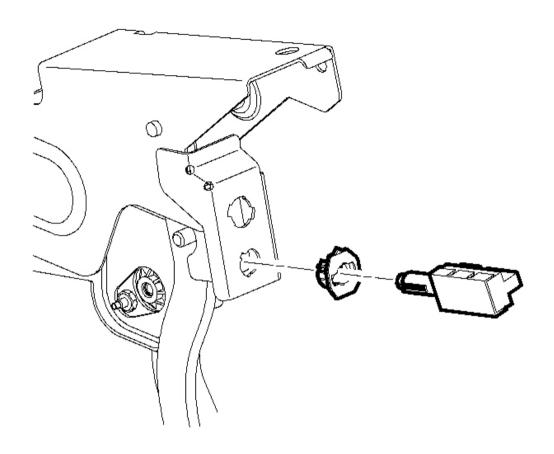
Removing/Installing Stop Lamp Switch Courtesy of GENERAL MOTORS CORP.
